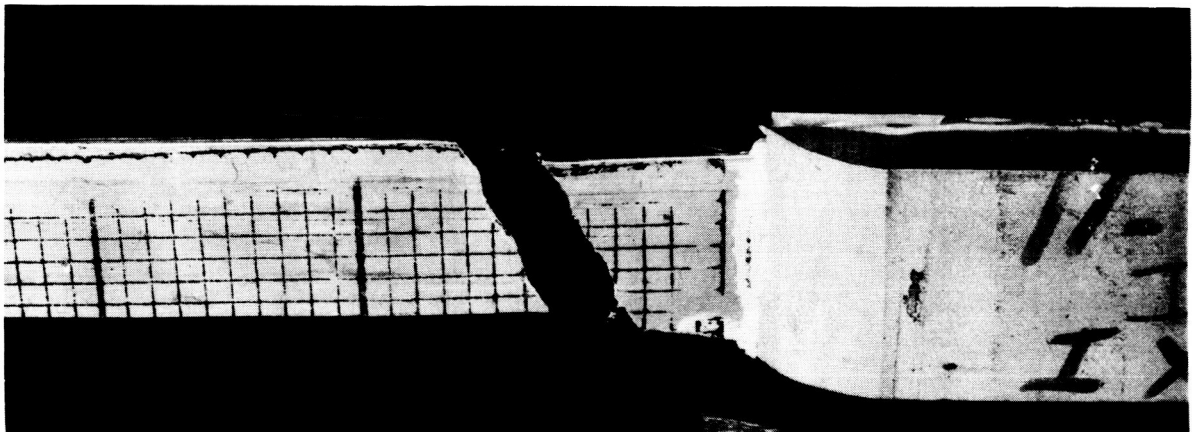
ALUMINUM + WIRE COMPOSITE TENSION SPECIMEN
